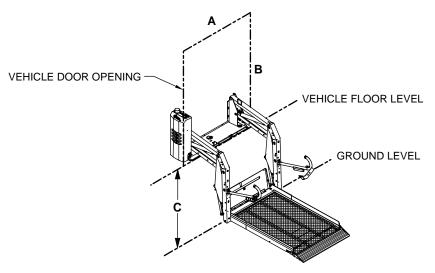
DOOR OPENING REQUIREMENTS
